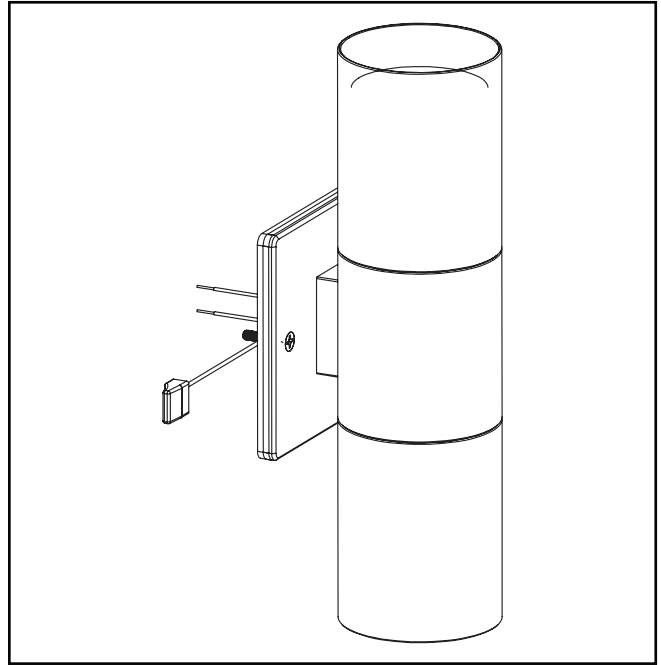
FIXTURE ASSEMBLY 9000-W1-WRS VERSION
